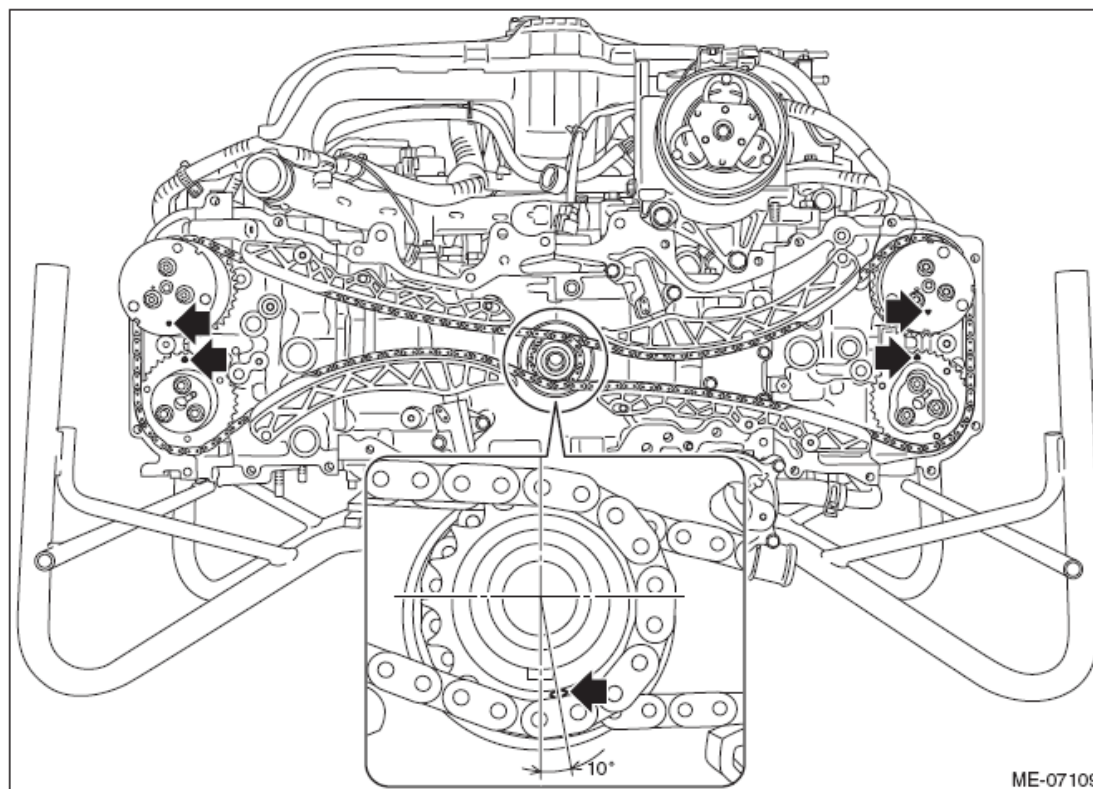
Locating Alignment Marks Of Cam And Crank Sprocket
